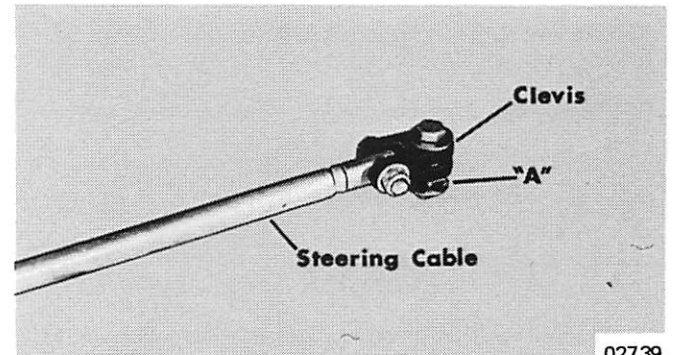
Engine Attachment - Mercury Models 1965 & Later
